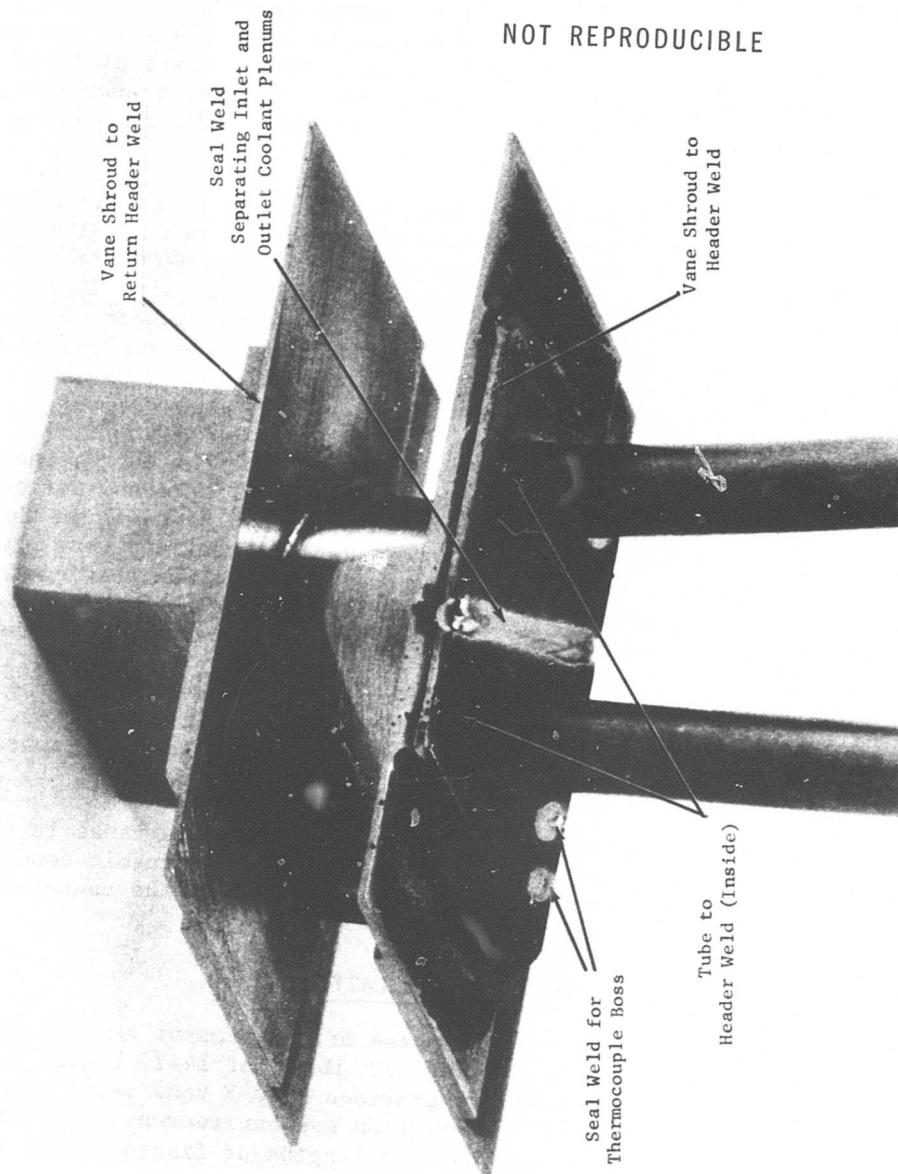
Liquid-Metal-Cooled Vane Electron Beam Welded Assembly.
